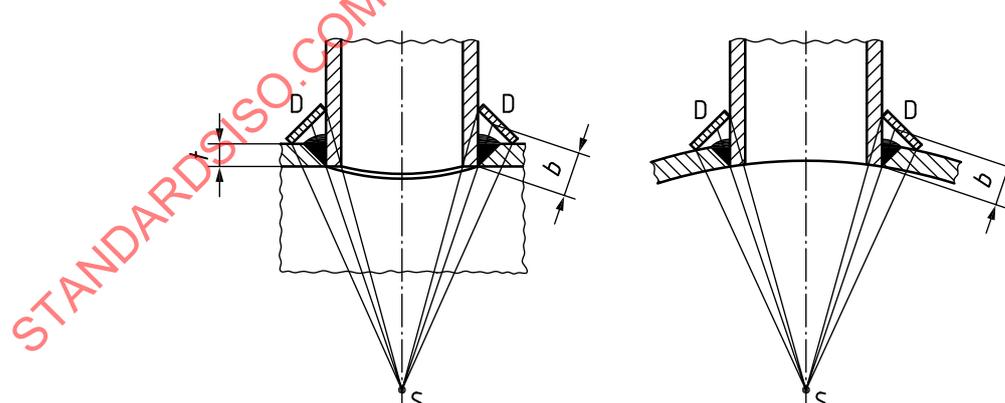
Arrangement for testing of set-in welds with a radiation source, located on the central pipe axis and perpendicular to the weld centre, and the detector outside
